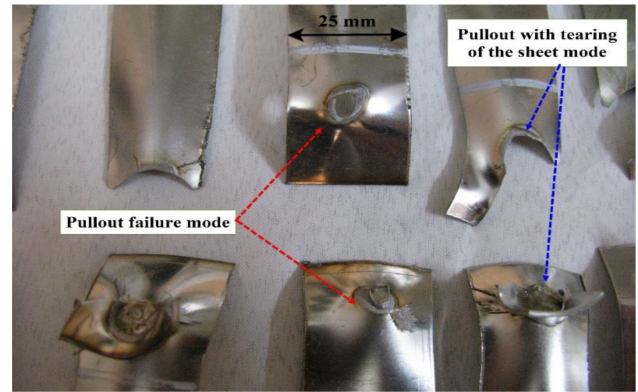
Tensile-shear test of resistance spot welded AISI 304 sheets.
